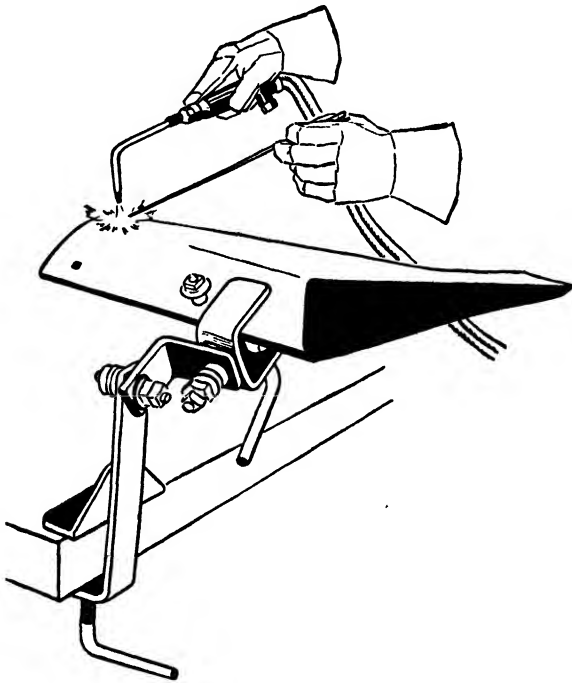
Many farm-machine parts may be hard-surfaced to make them stay sharp longer. The process of hard surfacing is similar to braze welding. Note the universal home-made clamp for positioning parts while hard surfacing or welding.
